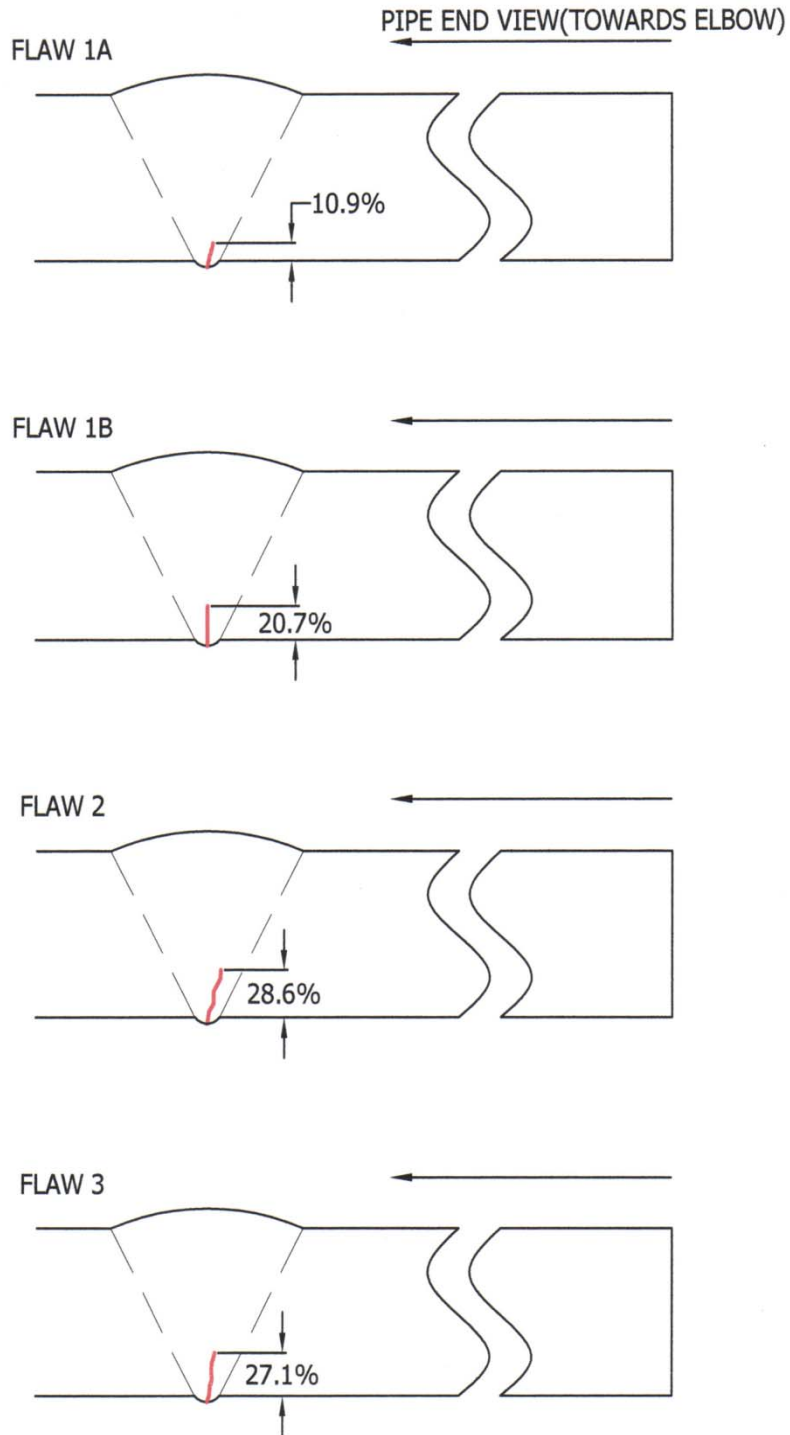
Side View Illustration of All Four Thermal Fatigue Cracks Implanted into PZR CASS Specimen 9C-001 (courtesy of FlawTech, Inc.)
